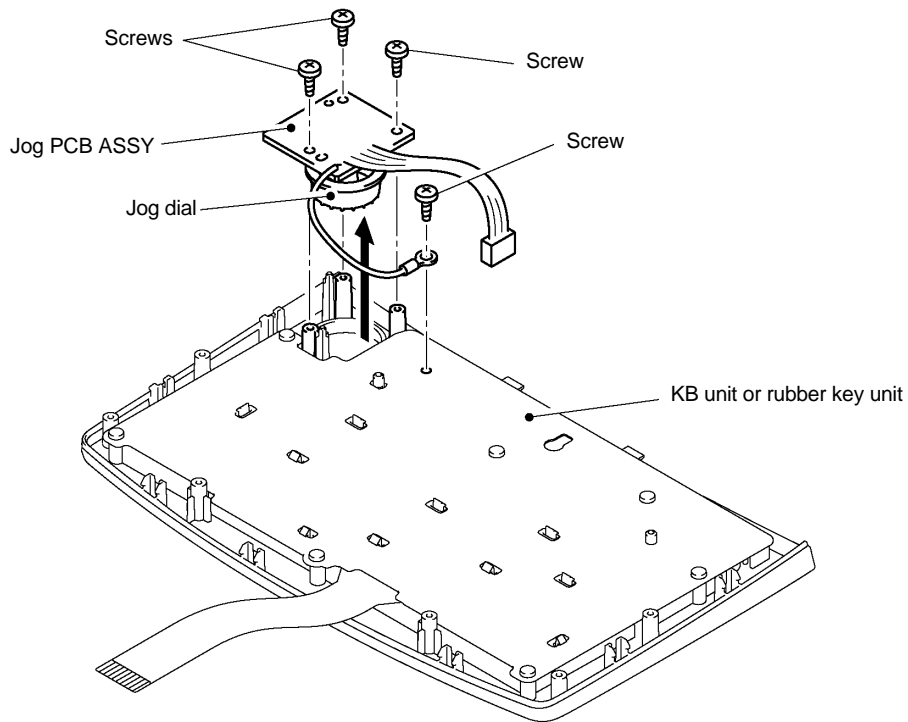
Disassembling the KB Unit/Rubber Key Unit (2)
